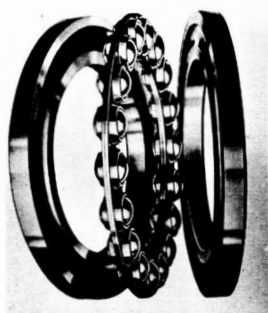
Thrust ball bearing. (Courtesy Marlin Rockwell Corporation.)
